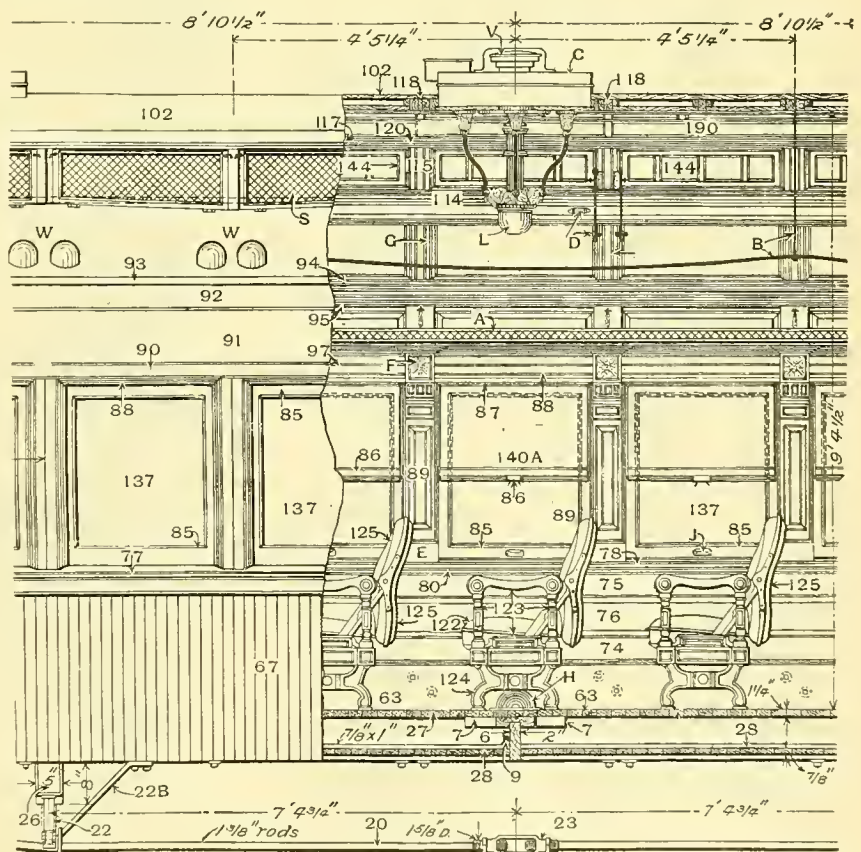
Sectional Side Elevation, showing Exterior and Interior
